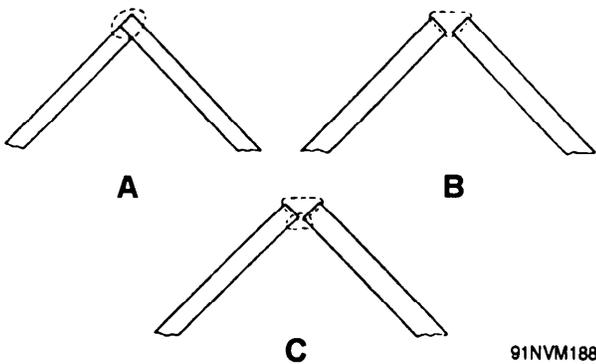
Corner joints. A. Closed joint. B. Open joint, welded from one side. C. Open joint, welded from both sides.
